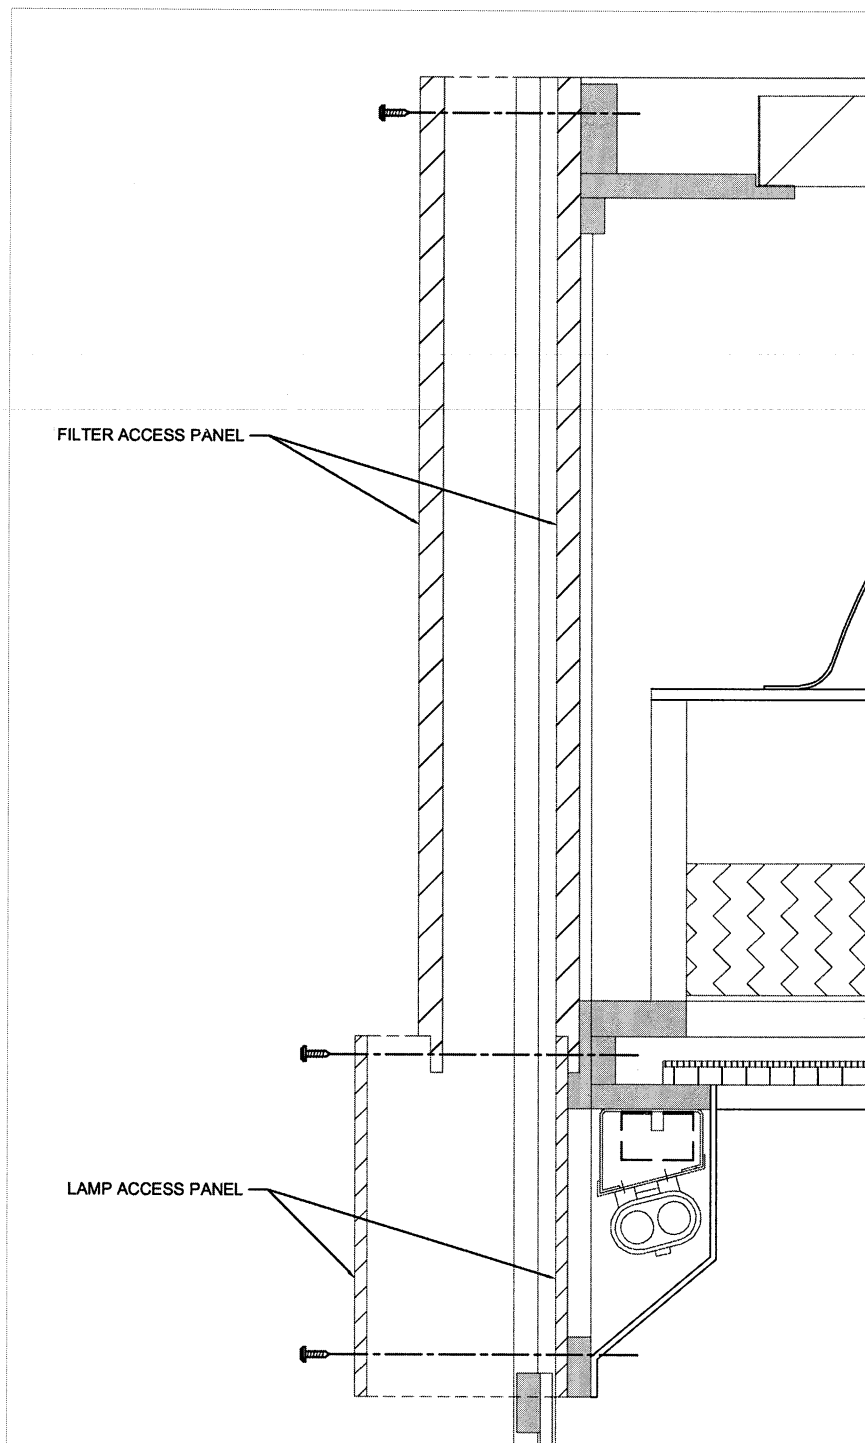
FILTER ACCESS PANEL REMOVAL
